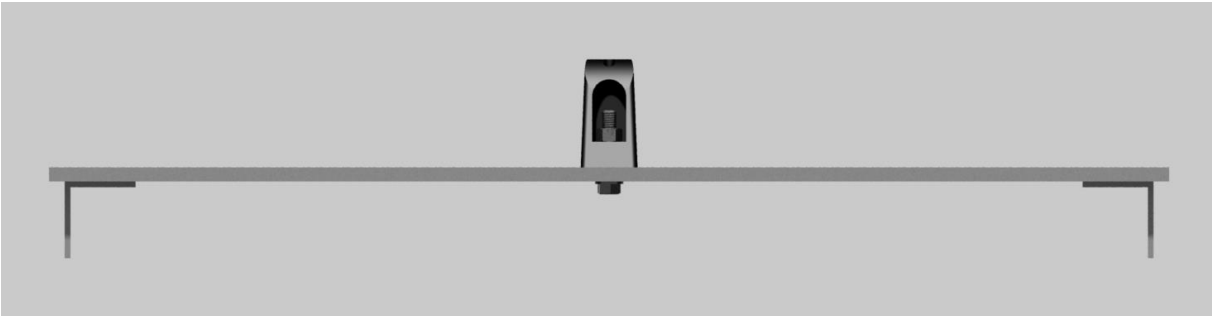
The side-view of the top plate, showing the positioning of the welded aluminium angles.
